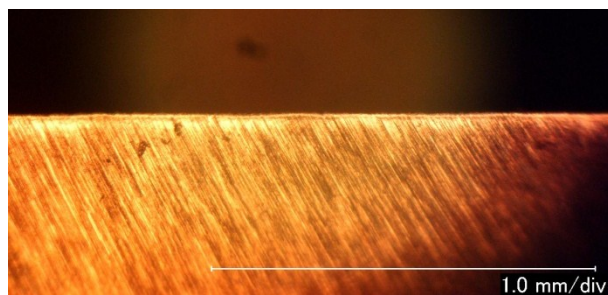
Tool flank wear width of Tool No.1 (Helix angle 0°) (Down cut method)
